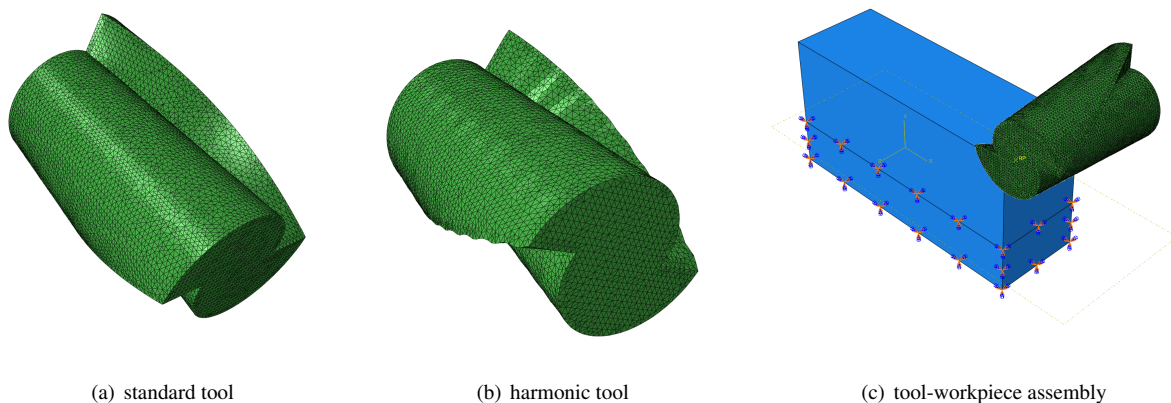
An illustration of the two endmill tools and a tool-workpiece assembly showing the boundary conditions.
